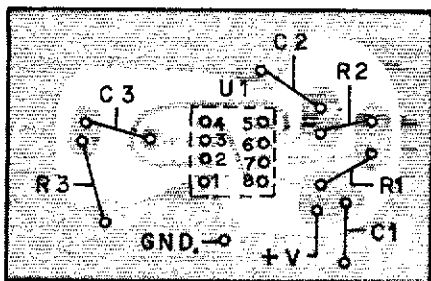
Suggested layout for a pc board, if desired (foil side shown). Full scale.
